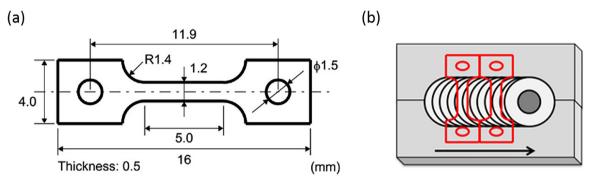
Specimen for tensile tests: (a) specimen dimension; (b) cutting position of specimen in welded joint.
